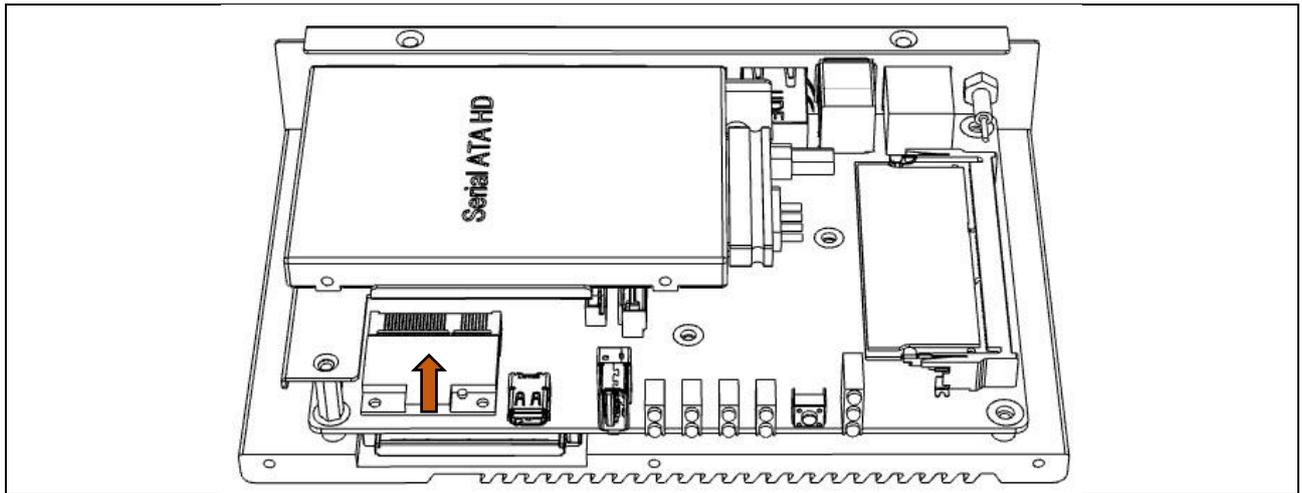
Insert and push down Half-sized Mini PCI-e module
